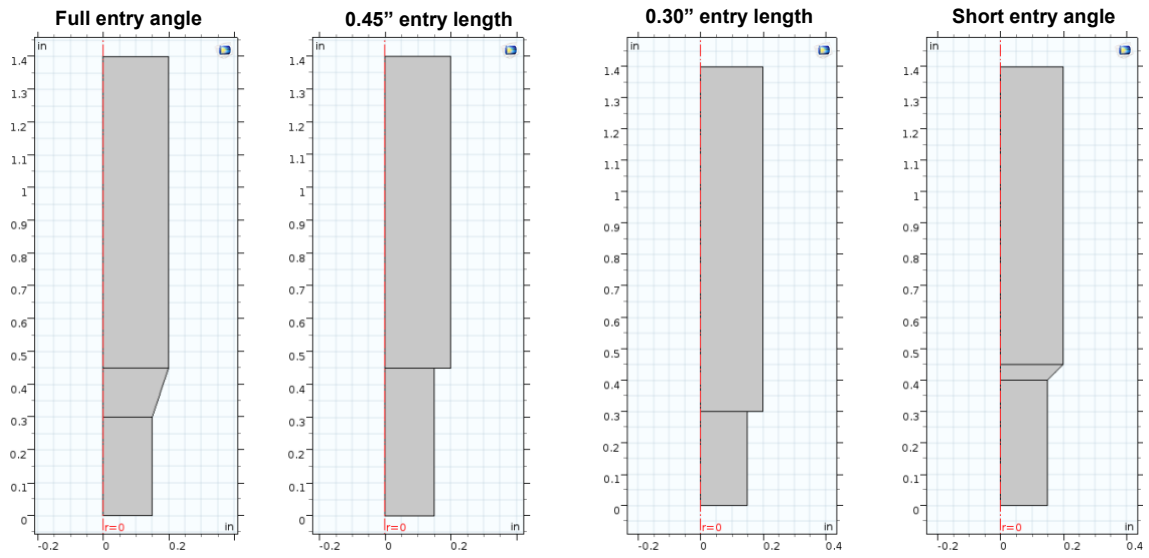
COMSOL nozzle geometries: 0.762 cm nozzle diameter
